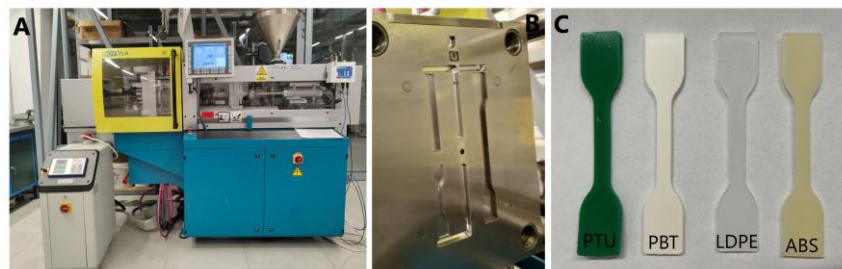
A) BOY 35 E injection molding machine (Dr. Boy GmbH, Germany); B) metal injection mold used for specimen fabrication; C) representative thermoplastic specimens prepared for mechanical testing
